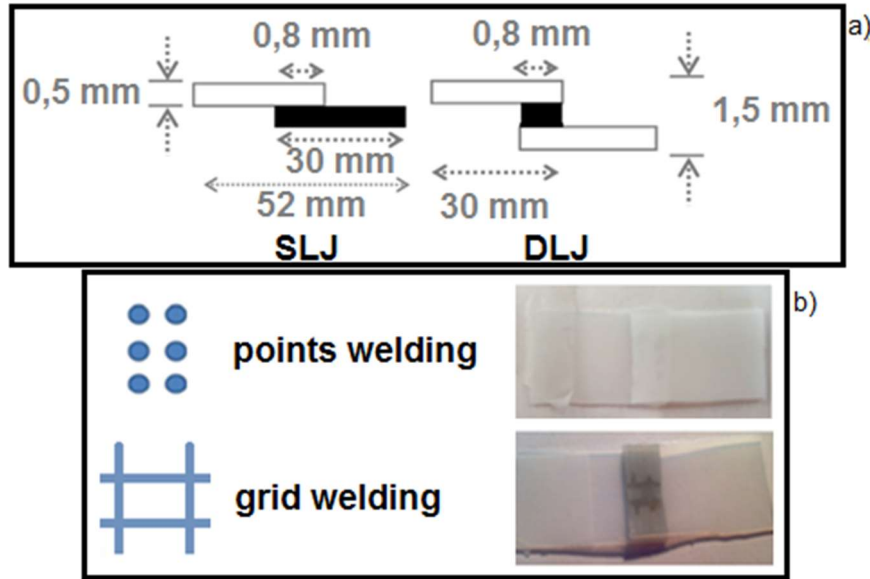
a) Single-lap (SL) and double lap (DL) joint geometries; b) welding geometries and typical joint.
